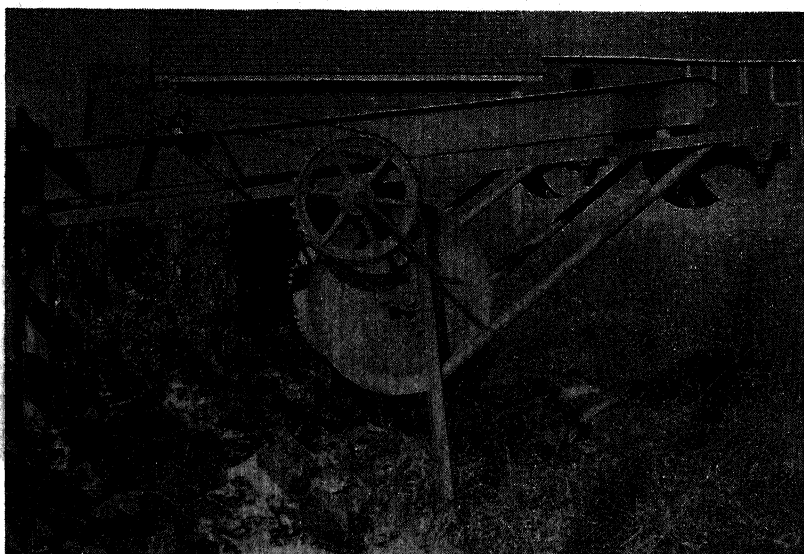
A. This barn cleaner is typical of many special farm machines that can be built at low cost with welded steel.
